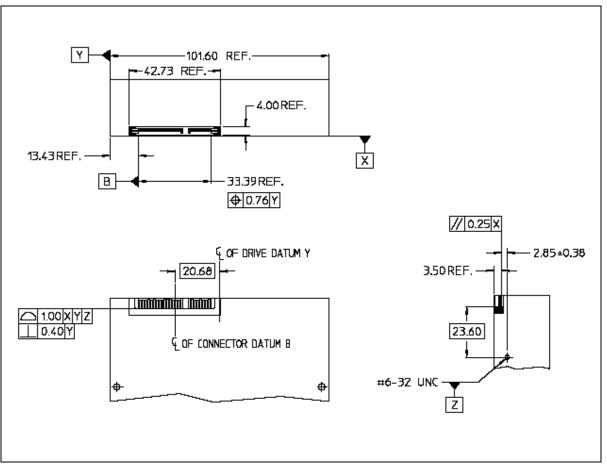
Device plug connector location on 3.5 inch side mounted device
